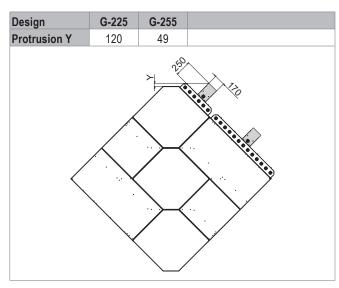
Dimension sheet adapter for Gotthard G-225 and G-255 (in mm)
